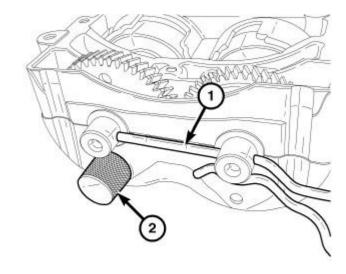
Balance Shaft Timing Tool Courtesy of CHRYSLER LLC
